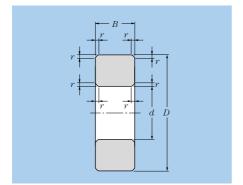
Radial Bearing (tapered roller bearings not included)
